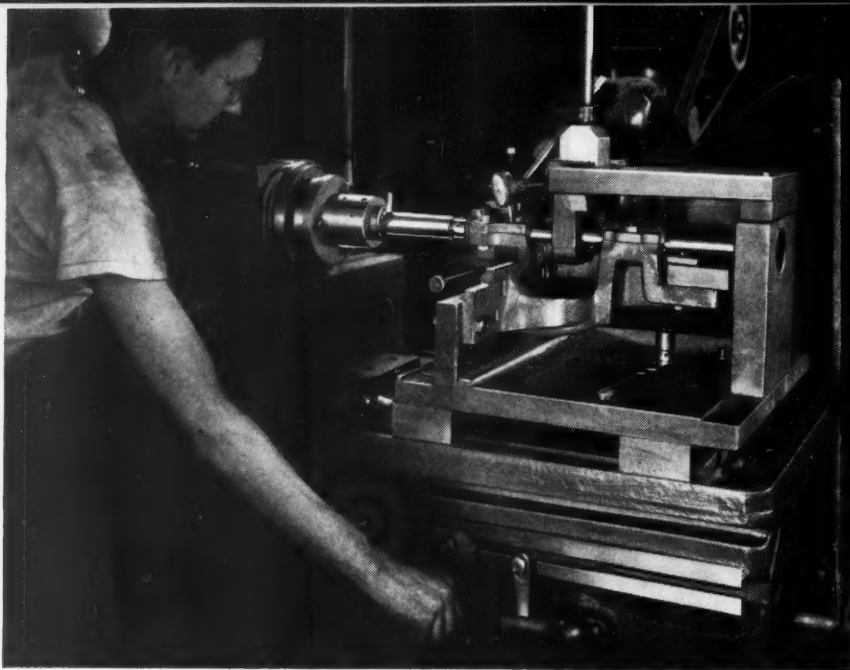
A special fixture containing bearings for supporting the long boring-bar is employed to insure proper alignment of the shaft to be mounted in this casting
